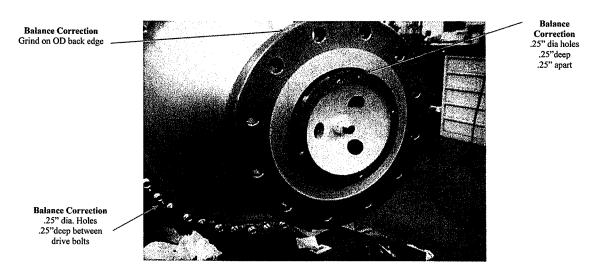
Weight Removal Location for Forward Sub Assembly Balance
